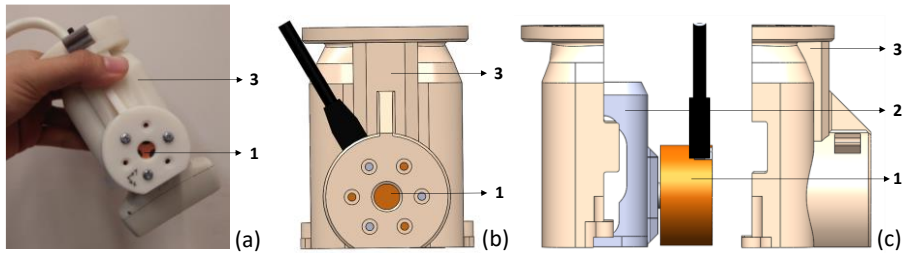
The 3-axis sensing US attachment. 1: the 3-axis force sensor; 2: inner case; 3: handheld case (a) The prototype of the design (b) front view of the design (c) side view of the design
